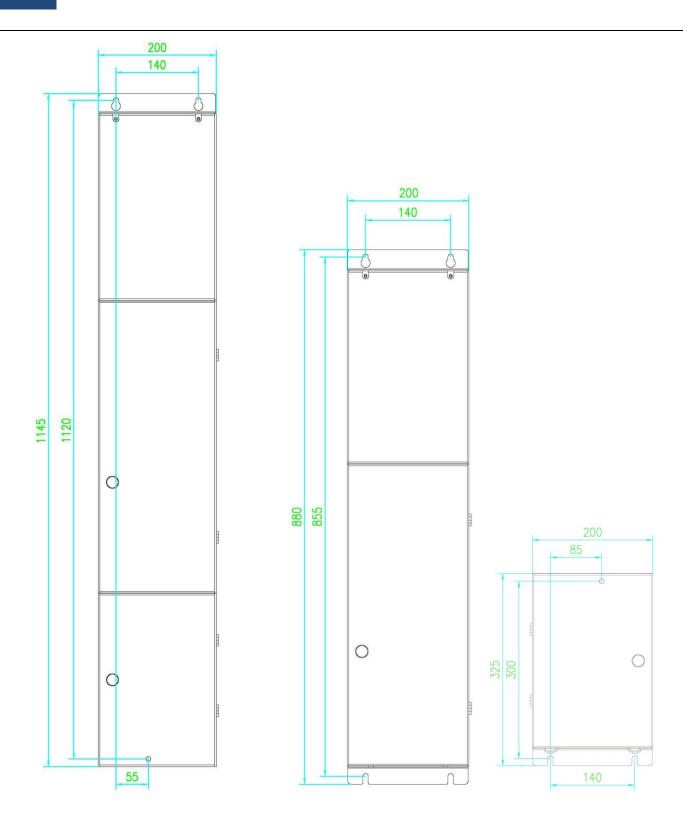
Wall-mounted installation (integrated) Figure 2.26 Wall-mounted installation (split type)
